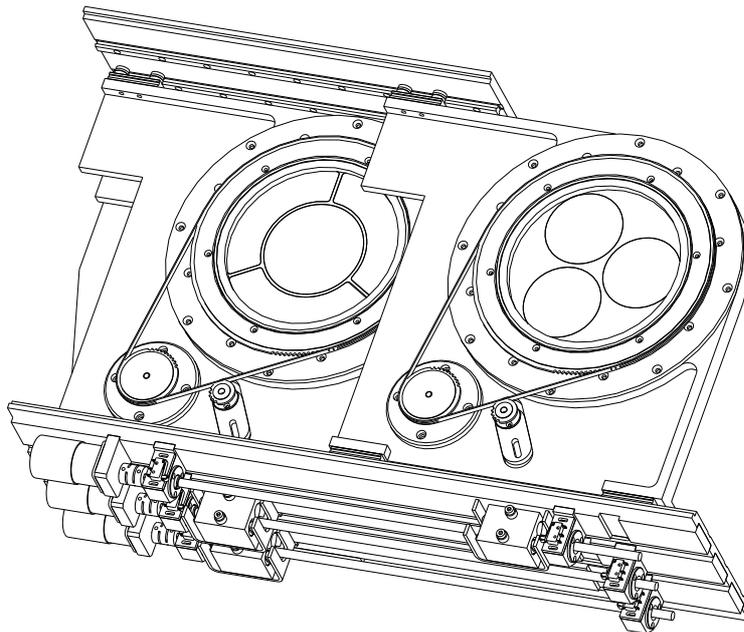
Linear Drive Design Showing Calibration Plate Deployed
